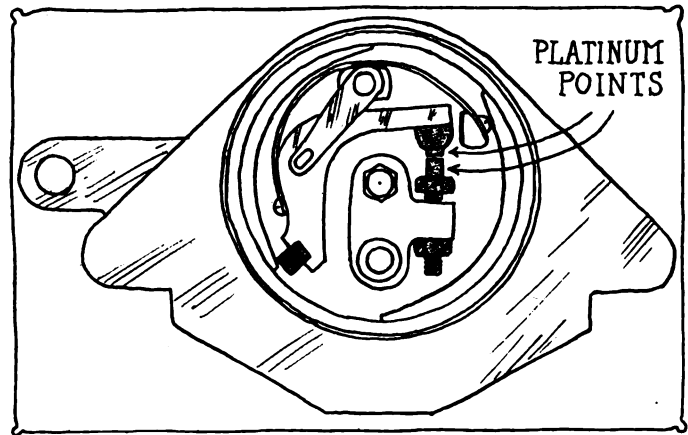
Breaker box mechanism of the Bosch, showing adjustment points
